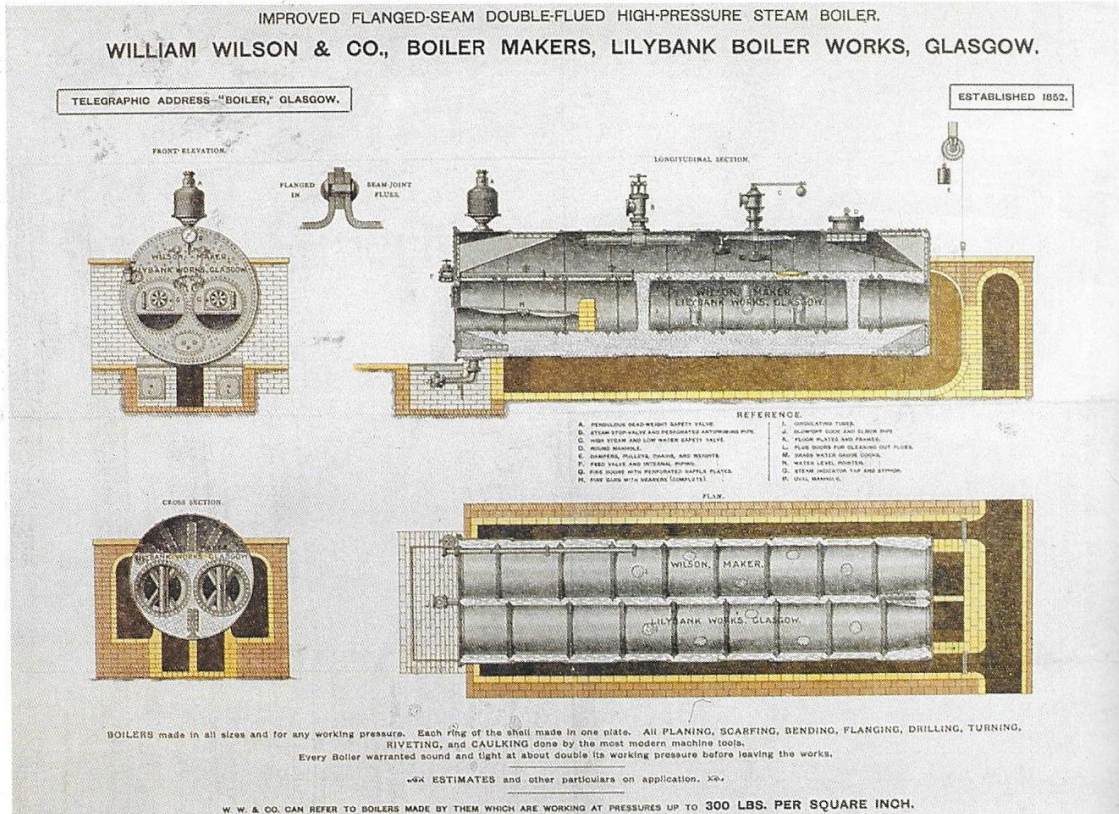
Framed Print: Steam Boilers, c1900. William Wilson & Co, Boiler Makers, Lilybank Boiler Works, Glasgow, Paul Yunnie Collection.
